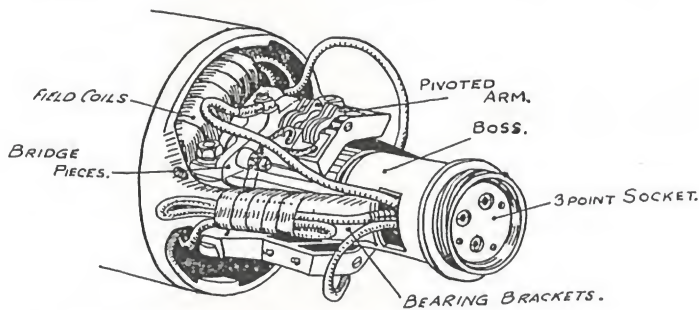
GENERATOR WITH REAR SPINNING REMOVED
